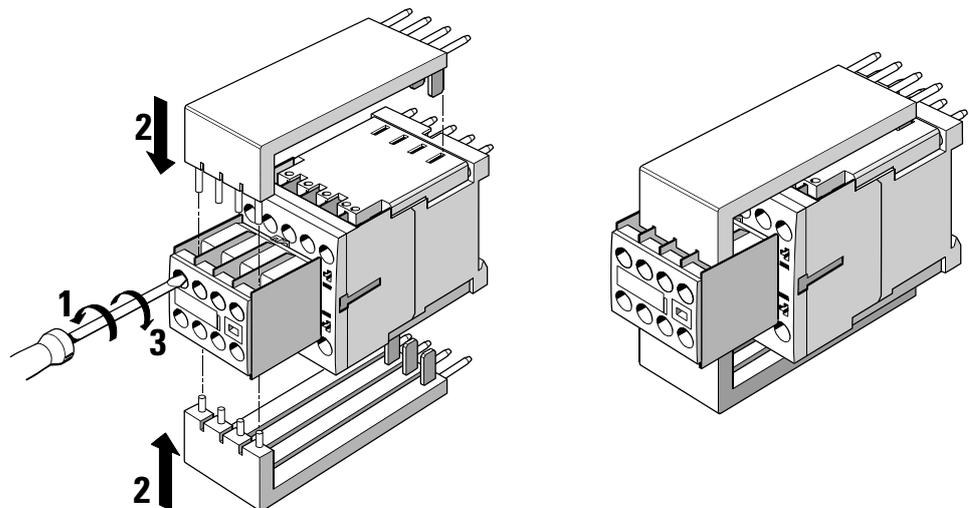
Mounting the soldering pin connection on a 4-pole auxiliary switch block
